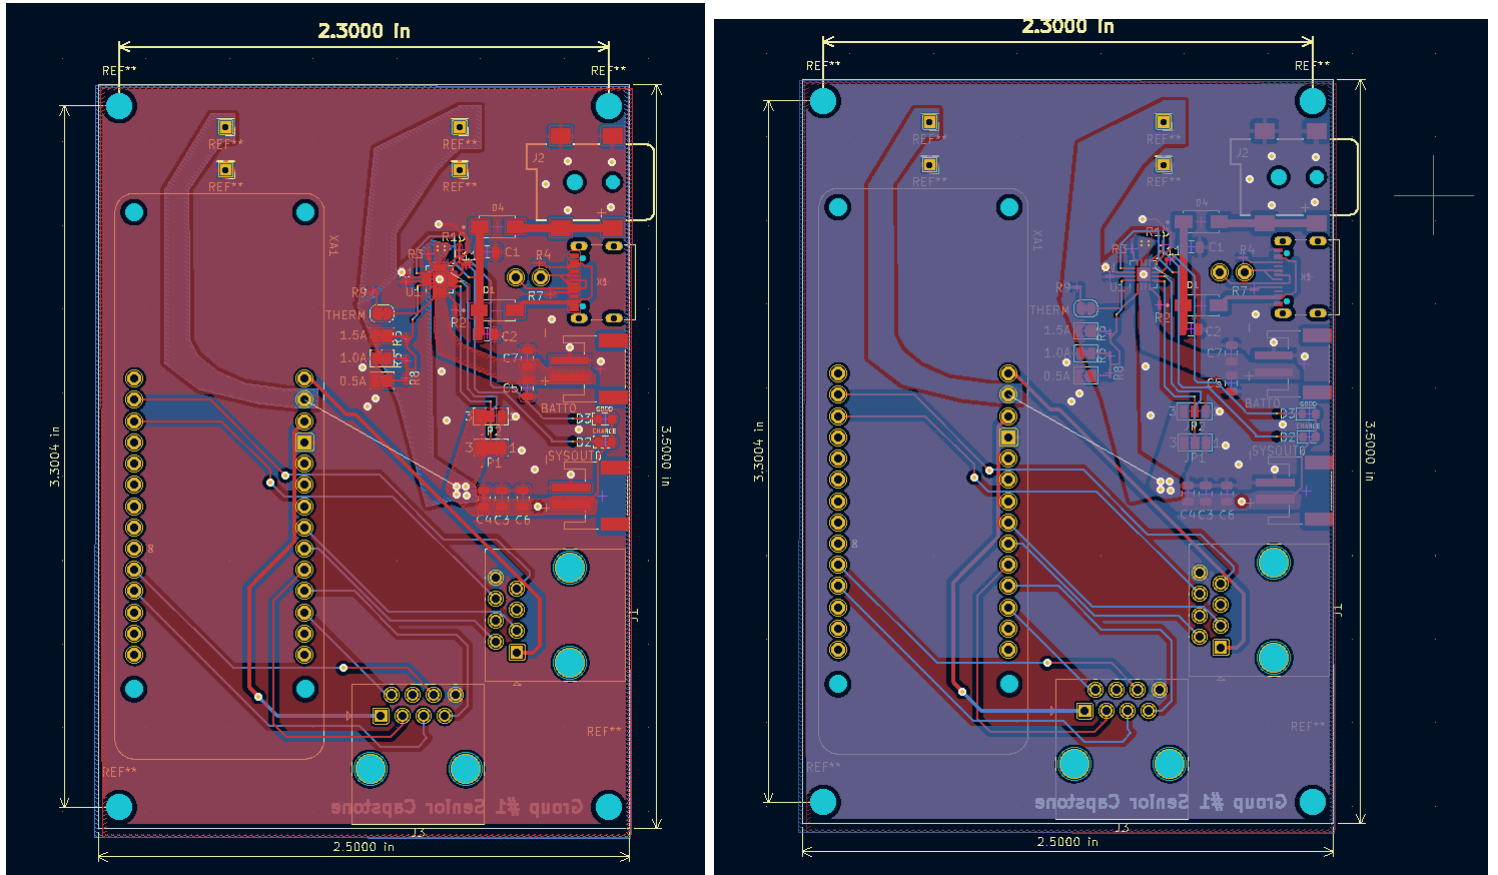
(Left)Top PCB Layer (Right) Bottom PCB Layer w/Dimensions (in)
